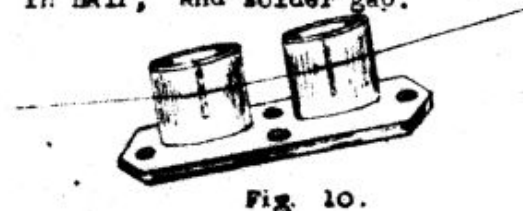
shows the fitting we can supply for housing two assemblies like Fig. 7, one for erase and one for record-playback. The set of parts, including wire, metal etc., 7/6d. However, the average amateur should be able to find similar pieces in his junk box to make the head for about threepence.
